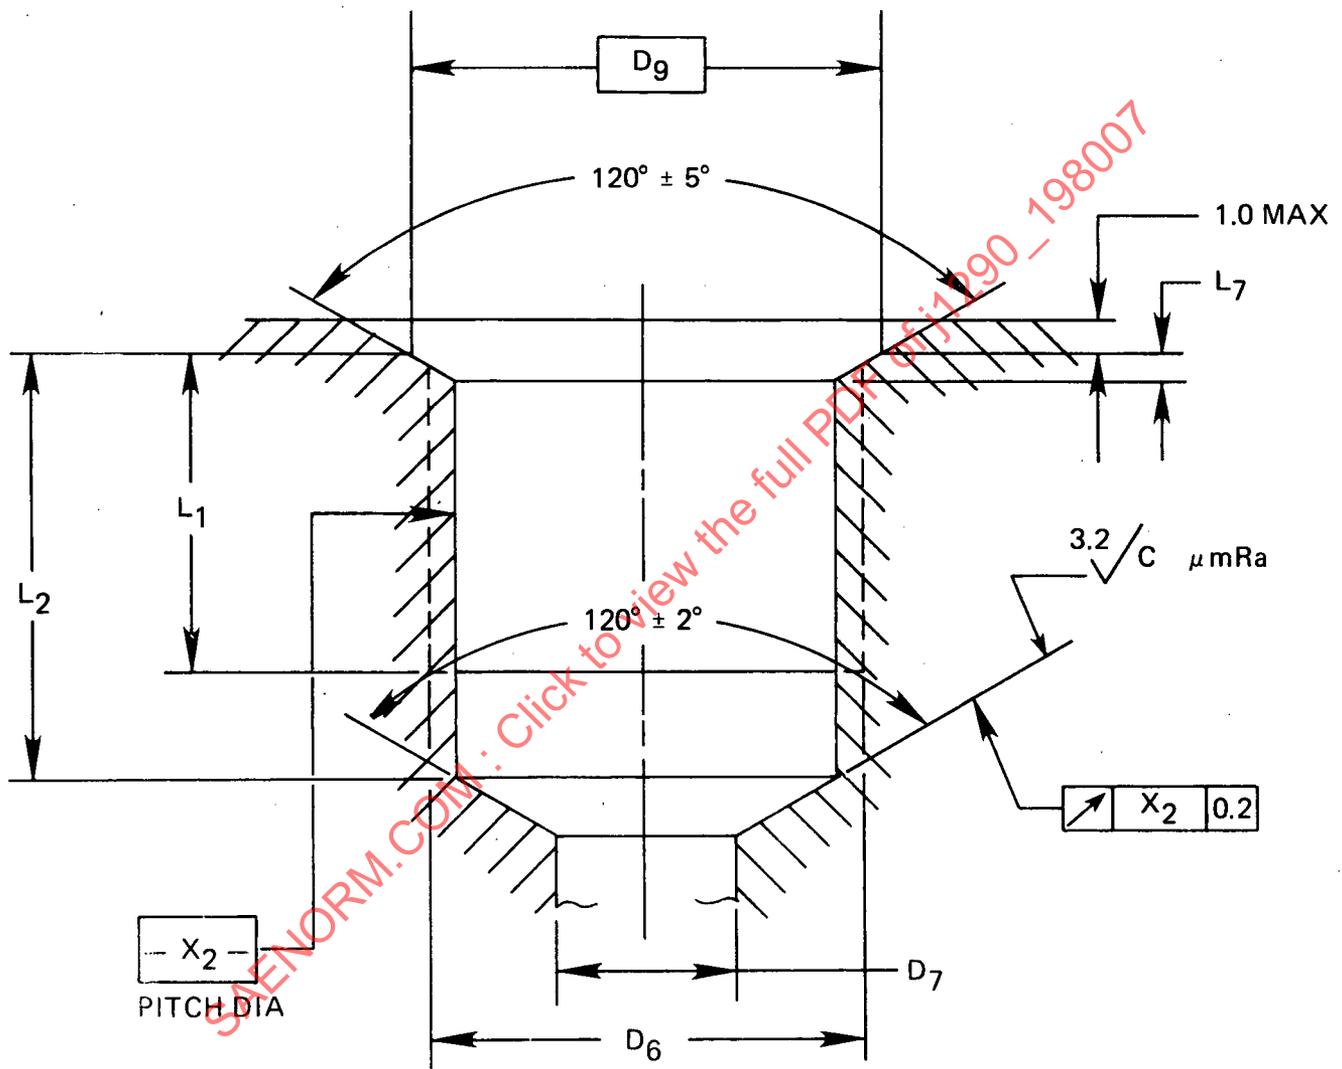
THREADED PORTS FOR TUBE NUTS (mm)
